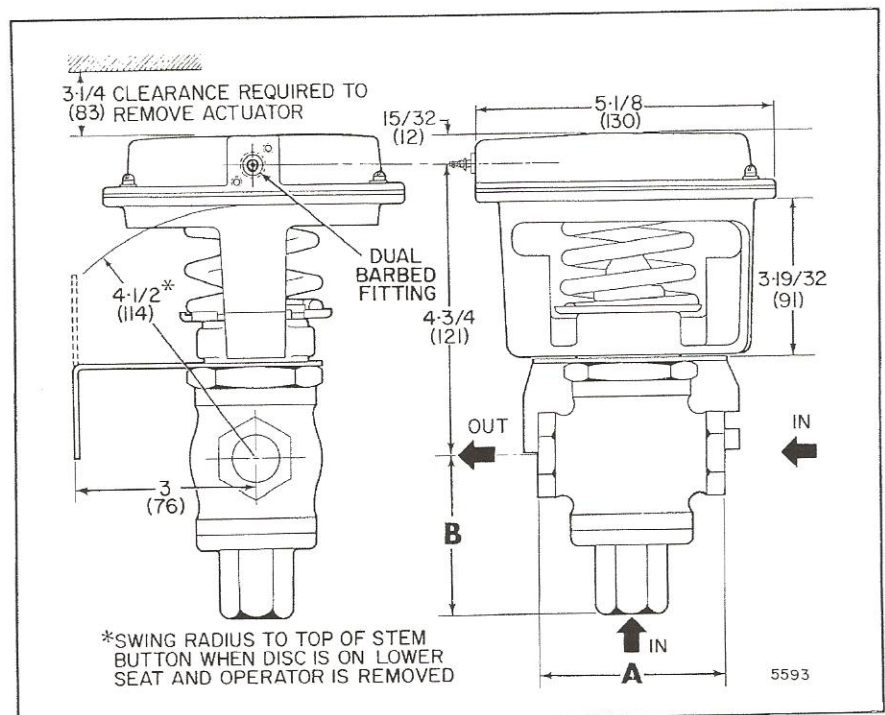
VP519C APPROXIMATE DIMENSIONS IN INCHES (MILLIMETERS) SEE TABLE 1 FOR A AND B DIMENSIONS
